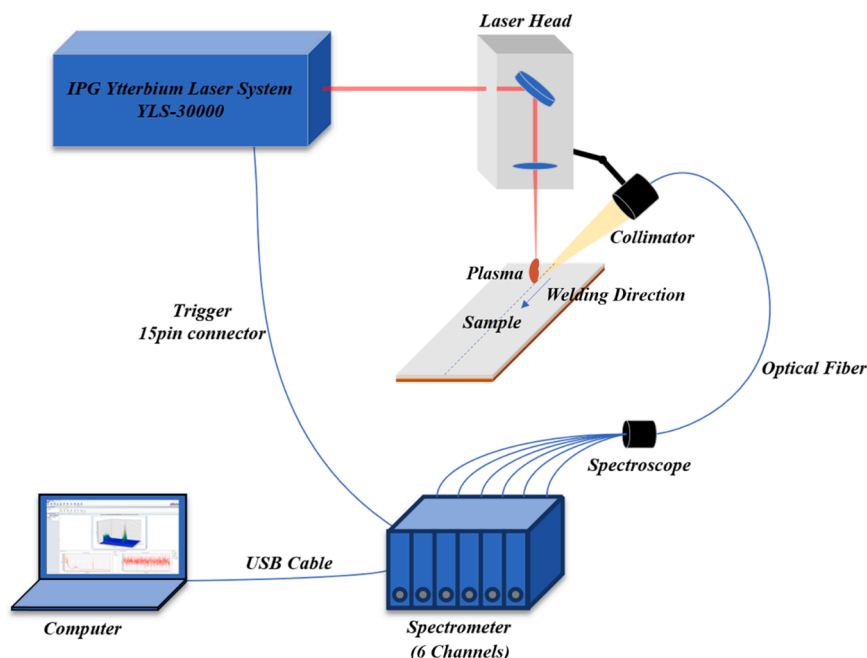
Laser welding experimental system with optical spectrum acquisition.
